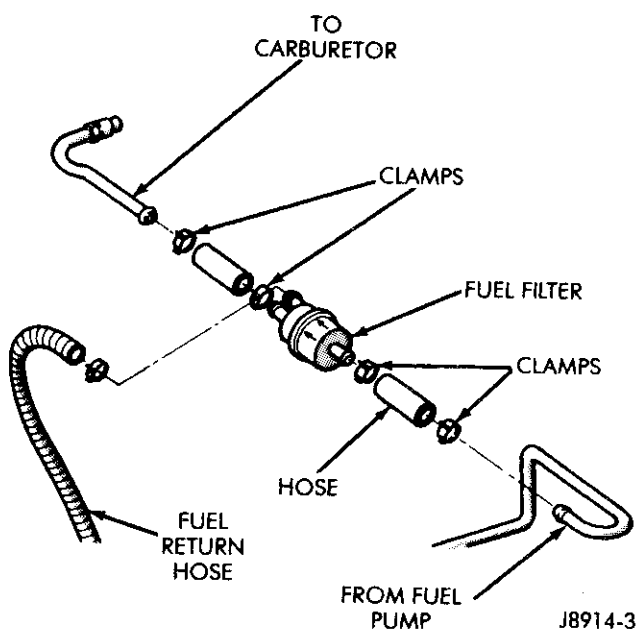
Fuel Filter Remove/Install—YJ Vehicles with 4.2L Engine
